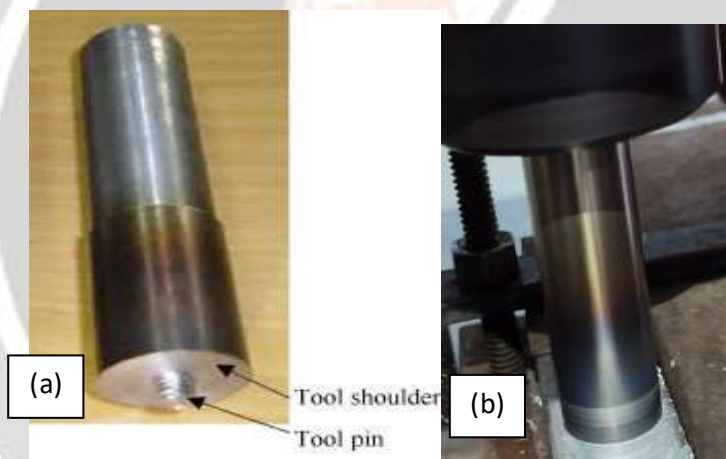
(a) HSS tool used for the process (b) Tool during the stirring process
